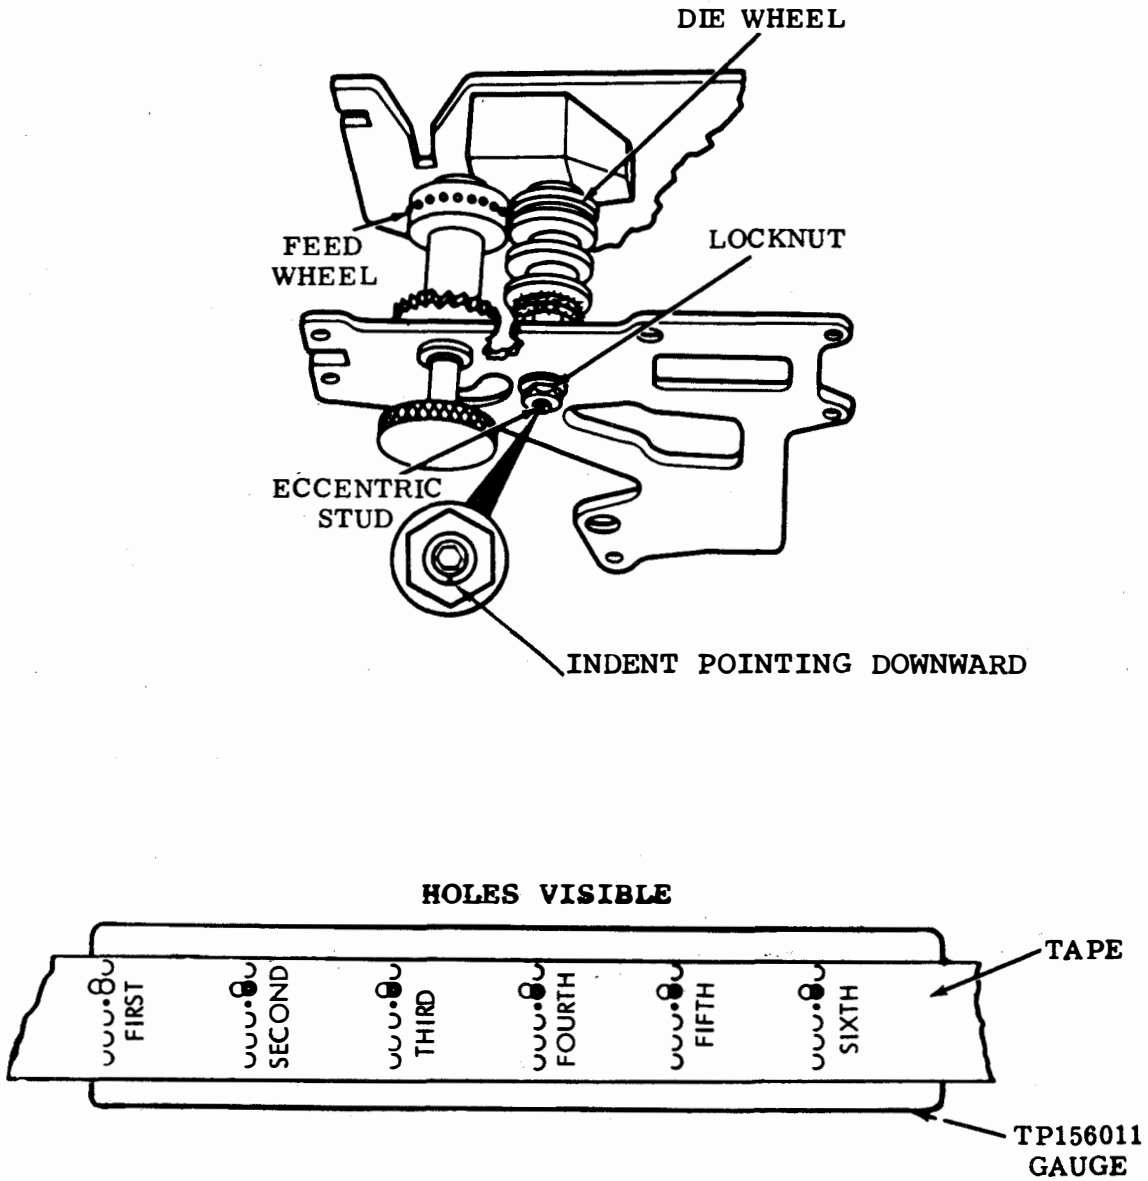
Feed Holes Spacing (Preliminary and Final)
